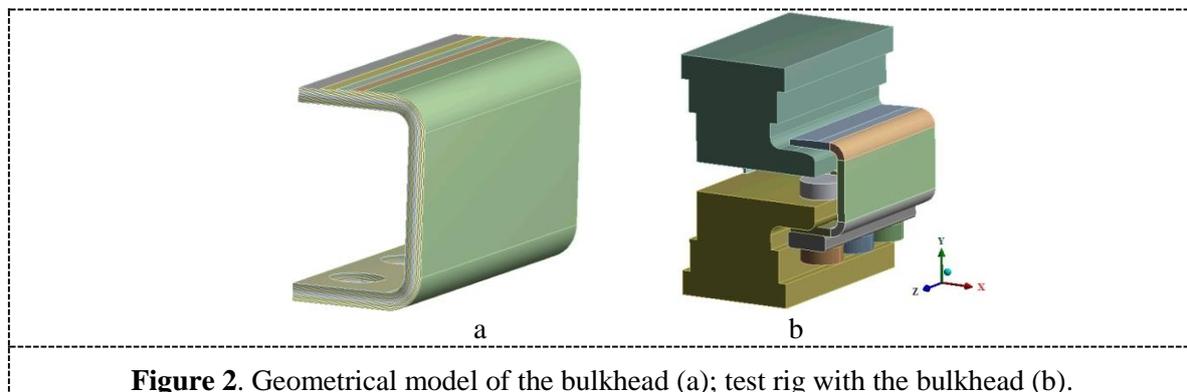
Geometrical model of the bulkhead (a); test rig with the bulkhead (b).
